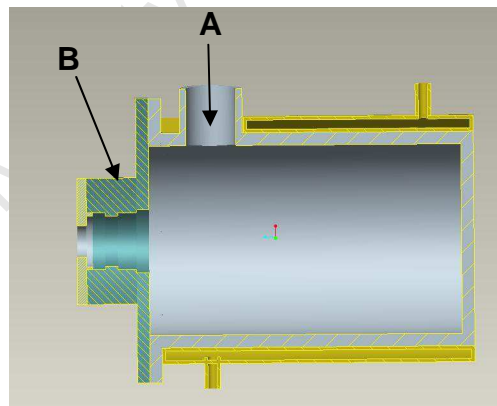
Cross-section view of mill assembly. A – feed inlet opening and B – hub flange which houses stirrer shaft bearings and seal.
